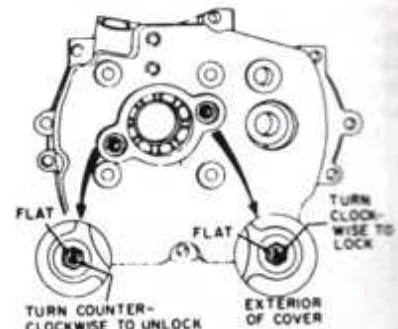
View showing bearing locks on Models HM70, HH70, HM80 and HM100 equipped with ball bearing main. Locks must be released before removing crankcase cover. Refer to Fig. T37 for interior view of cover and locks.
